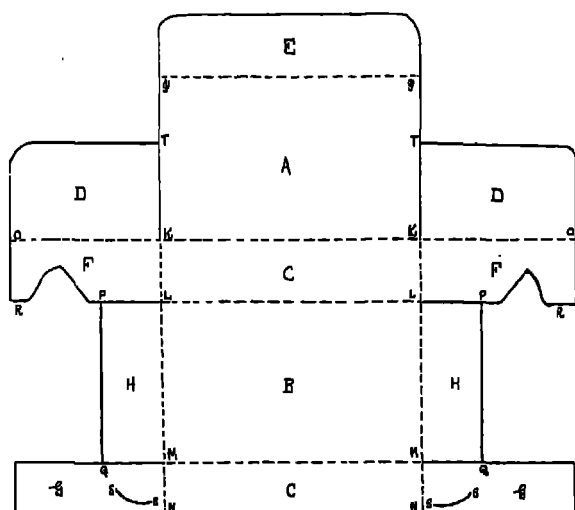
SINGLE-PIECE PAPER CLIP BOX.
